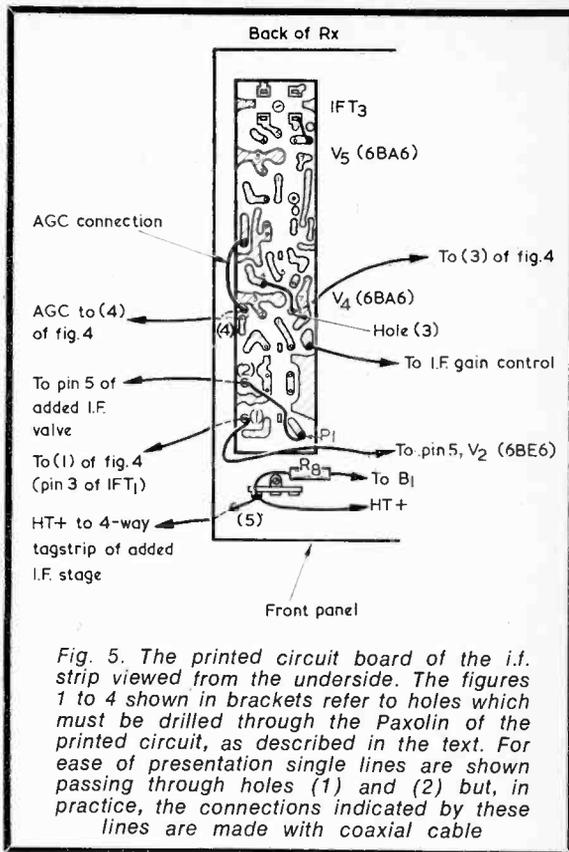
The printed circuit board of the i.f. strip viewed from the underside. The figures 1 to 4 shown in brackets refer to holes which must be drilled through the Paxolin of the printed circuit, as described in the text. For ease of presentation single lines are shown passing through holes (1) and (2) but, in practice, the connections indicated by these lines are made with coaxial cable
